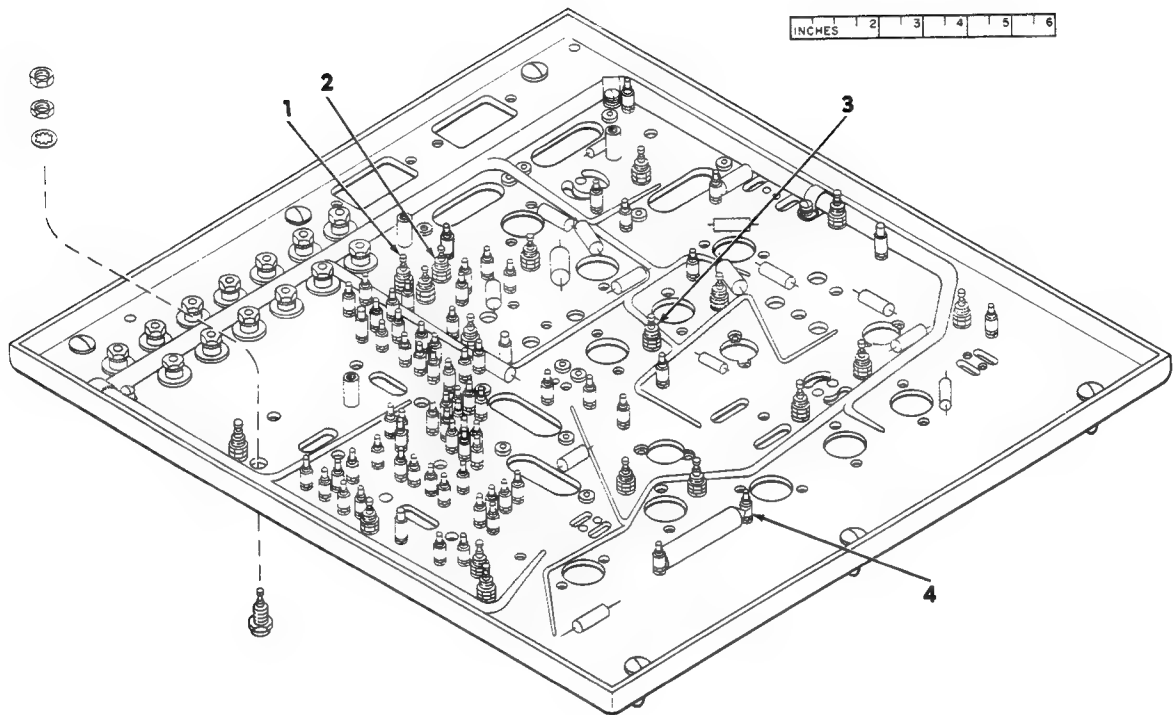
Synchronizer, electrical (9983715)—partial exploded view
